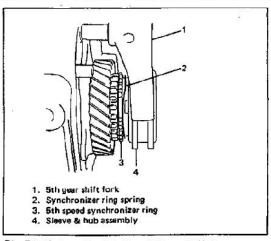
A-82 Installing 5th Speed Sleeve & Hub
